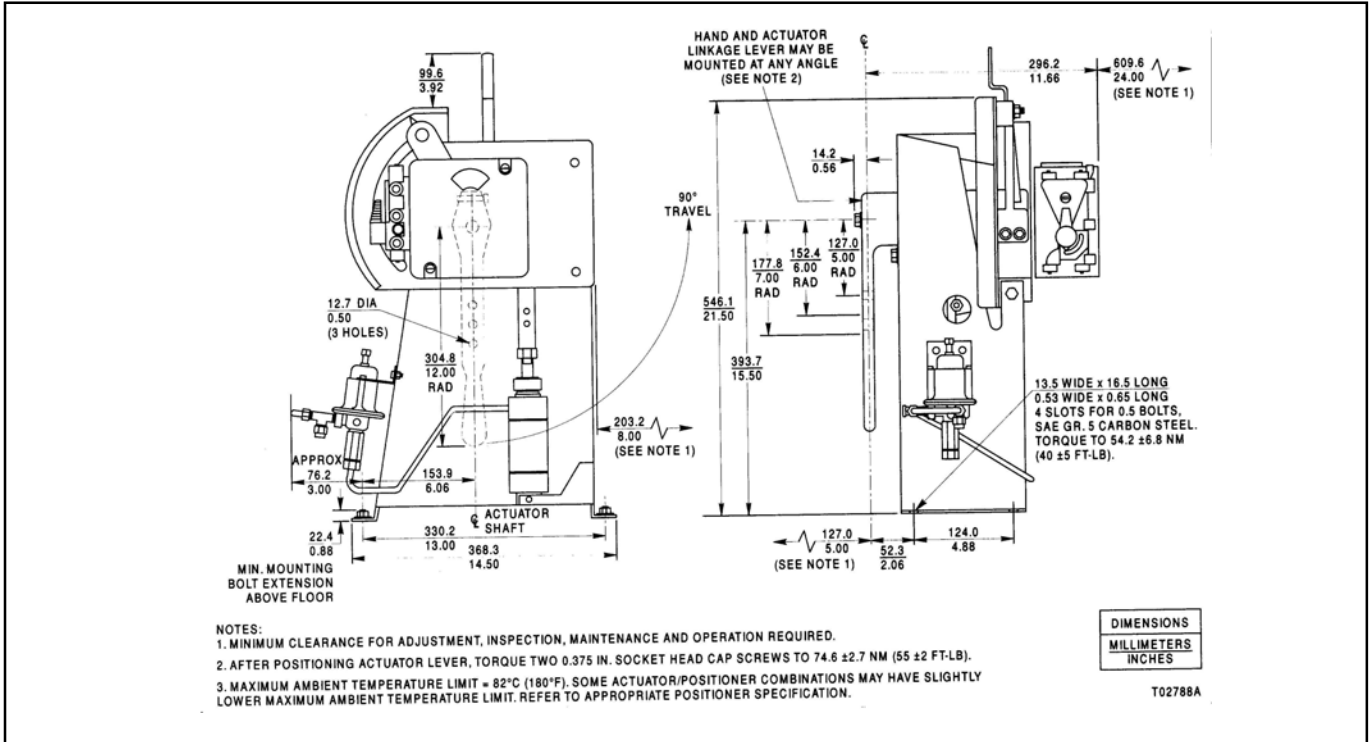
Type UP1 Actuator with Positioner and Air Failure Lock
